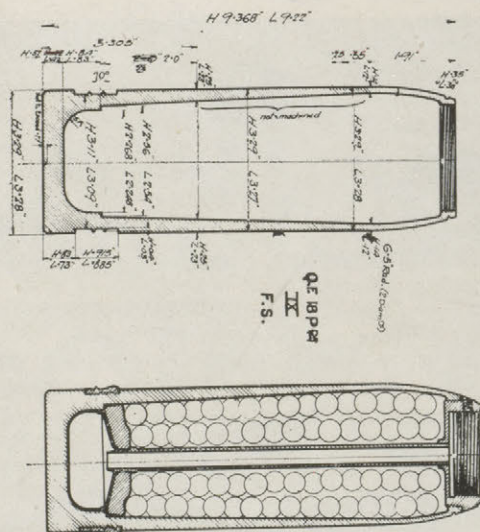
18 Pr Shrapnel Steel Blank and Forging.
